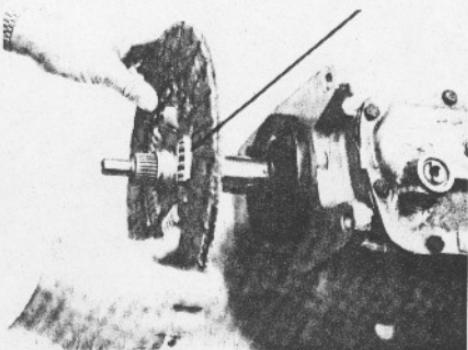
Lapping the clutch disc on the clutch gear to remove any burrs.
